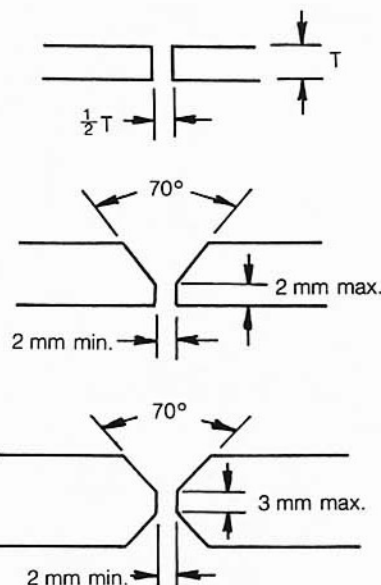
Butt welds, low-carbon steel (elec.)
